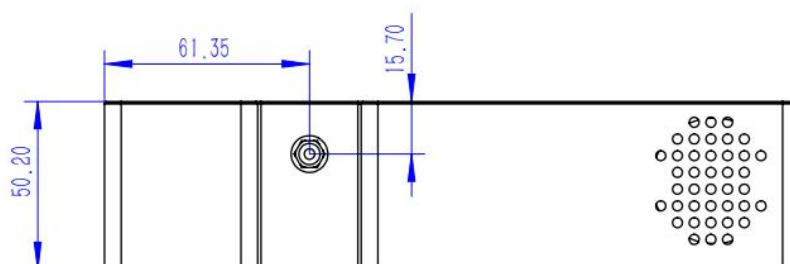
Mechanical Dimensional Drawing (Horizontal View)
